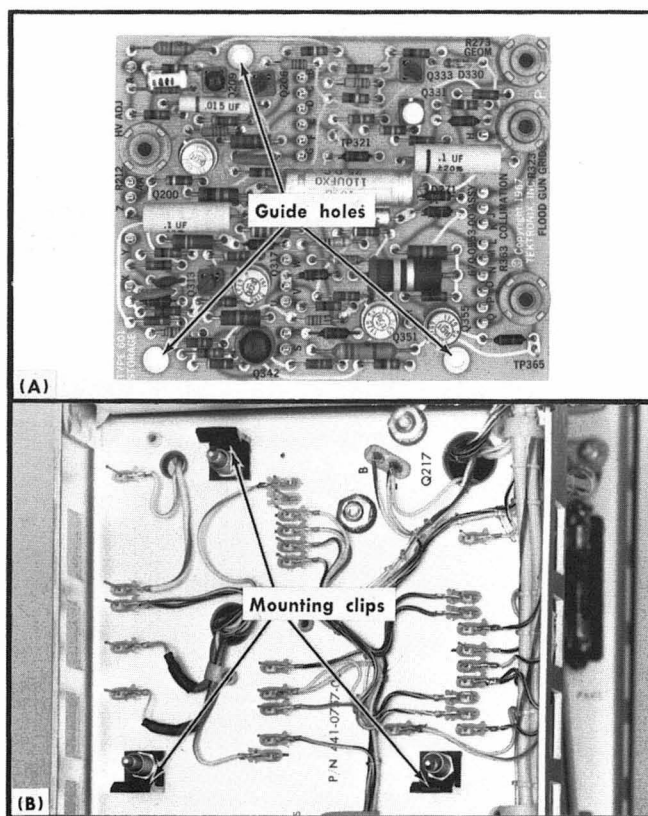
(A) Circuit board guide holes and (B) chassis guide pins.
